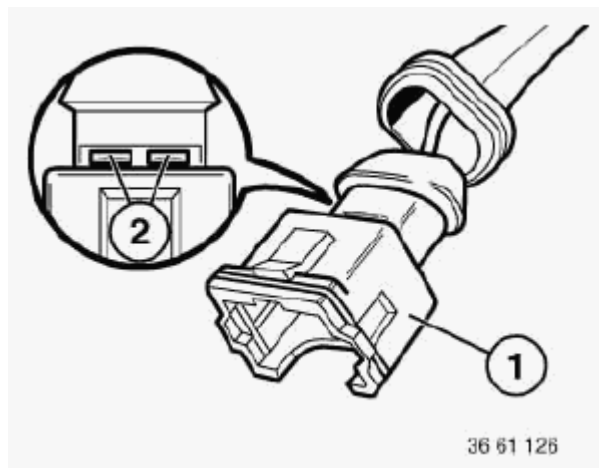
Identifying Ultrasonic-Welded Connectors
